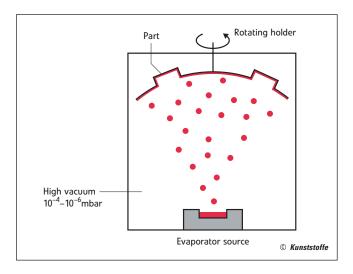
Physical Vapor Deposition: The headlight is mounted on a rotating holder and aluminized under high vacuum
